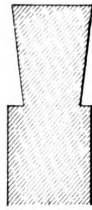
Section of Wheel Showing Two Corners for Grinding.
